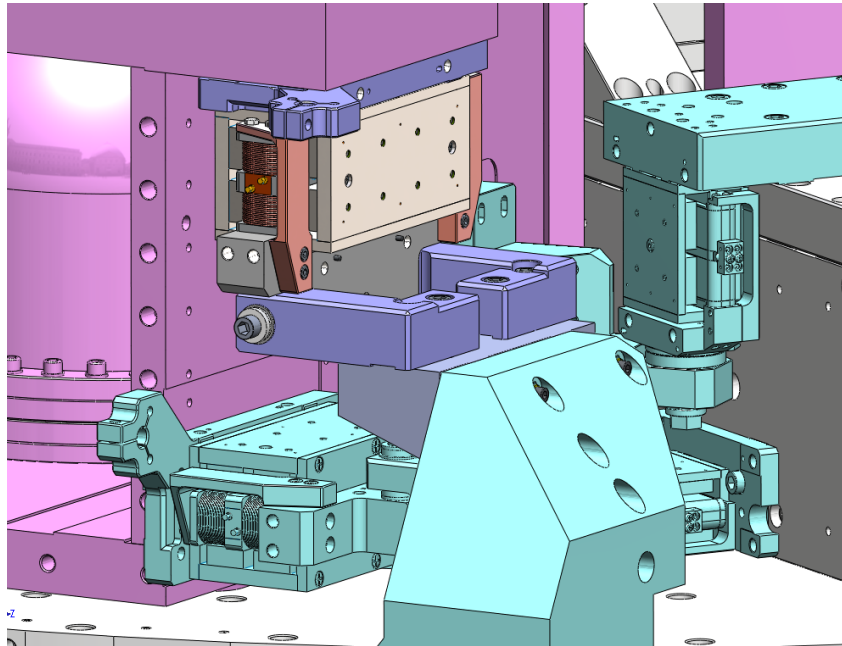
D0901102 & D0901103 Actuators Assemblies fully installed
